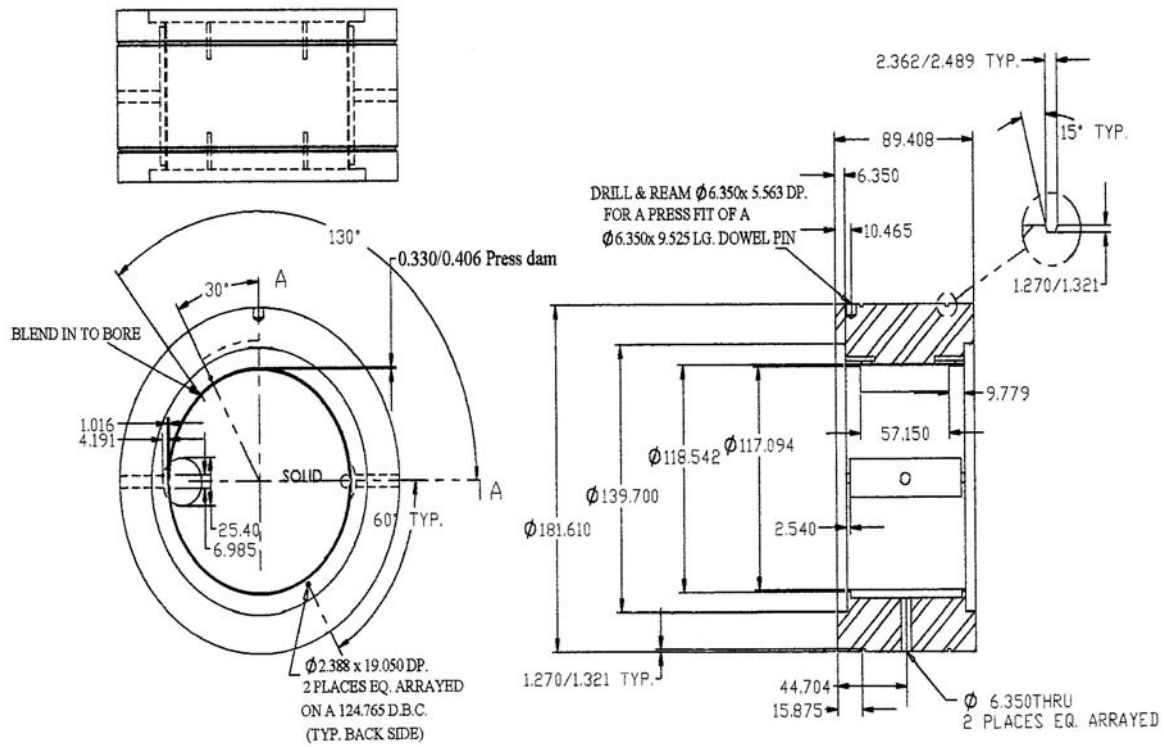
Test bearing with pressure-dam at the unloaded pad
